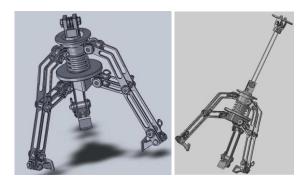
Designed gripper and illustration of SMA attachment to the gripper pulley
